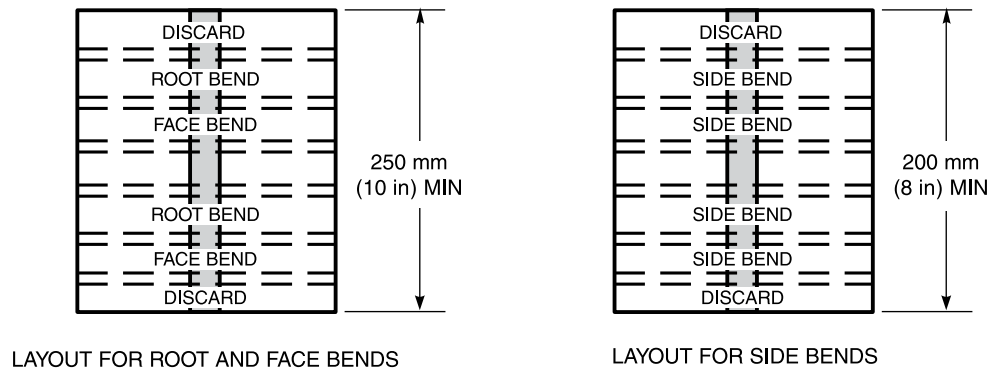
Location and Type of Test Specimens on Welded Plate Test Procedure Qualification Assembly, Class A Groove Welds
